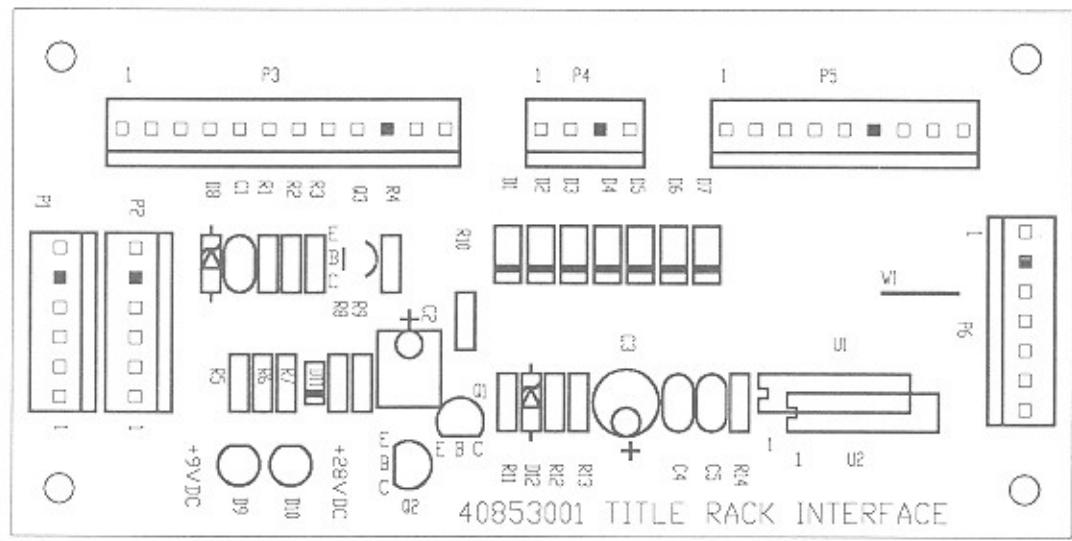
B. Title Rack Interface Circuit Board Layout 40853001 - A
